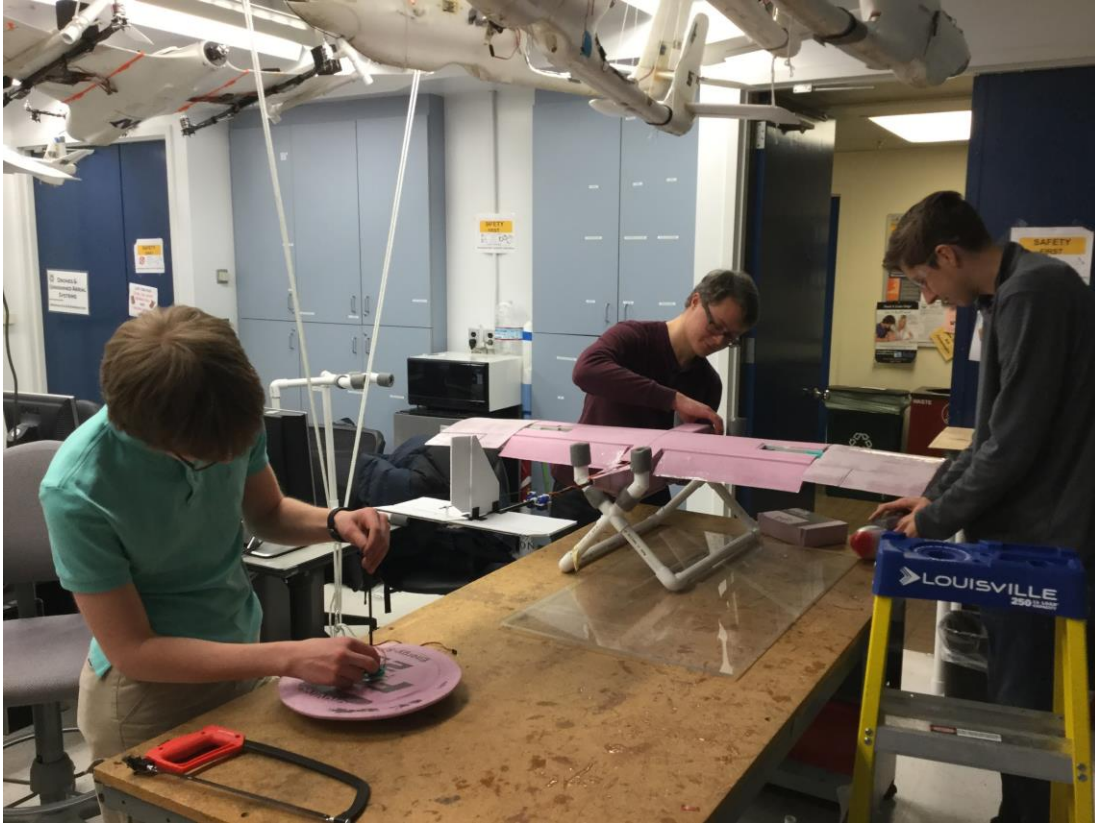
Team construction meeting, assembling radome and drop mechanisms
